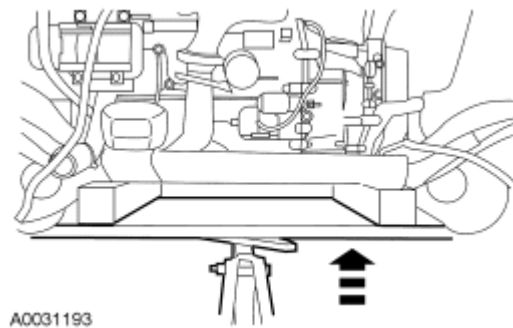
Raising Engine, Transaxle & Subframe Assembly
